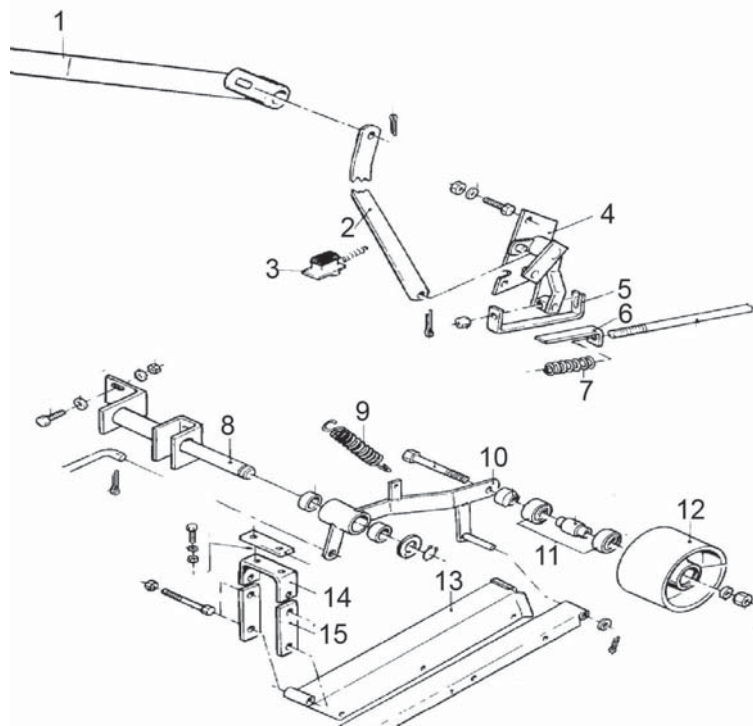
Structure of header engaging mechanism: 1 – engagement lever, 2 – connecting link, 3 – switch, 4 – hinge, 5 – bracket, 6 – indicator, 7 – spring, 8 – tightener lever shaft, 9 – tightener spring, 10 – tightener lever, 11 – belt pulley bearing, 12 – belt pulley, 13 – tightener bracket, 14, 15 – brackets
